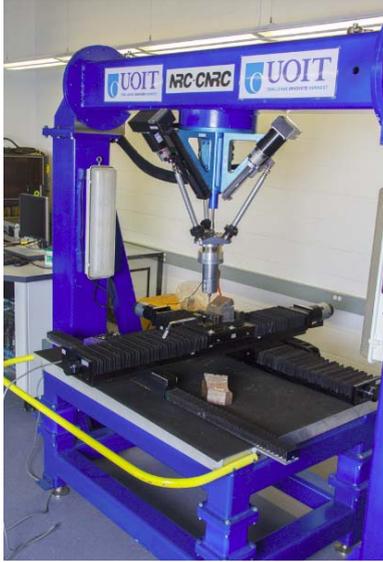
3-DOF parallel robotic machine tool developed in the R&A Lab in UOIT.
